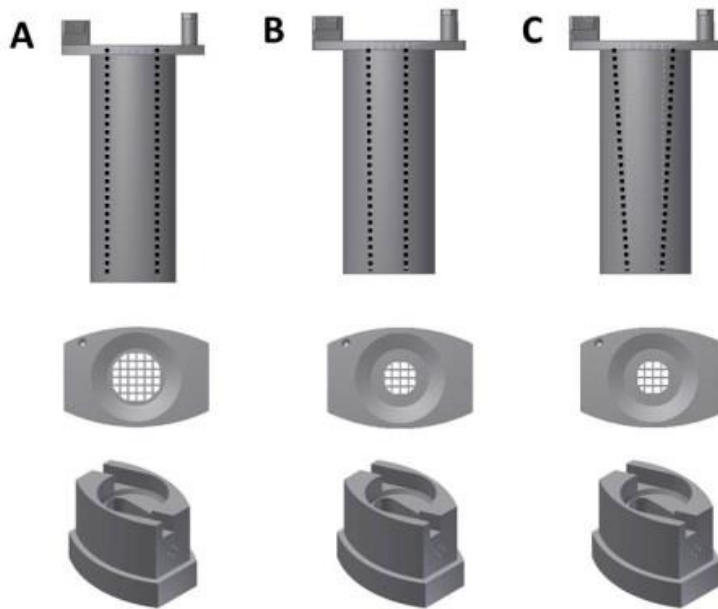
A) Original; B) 2/3 Inner Tube Width; C) Tapered Tube
